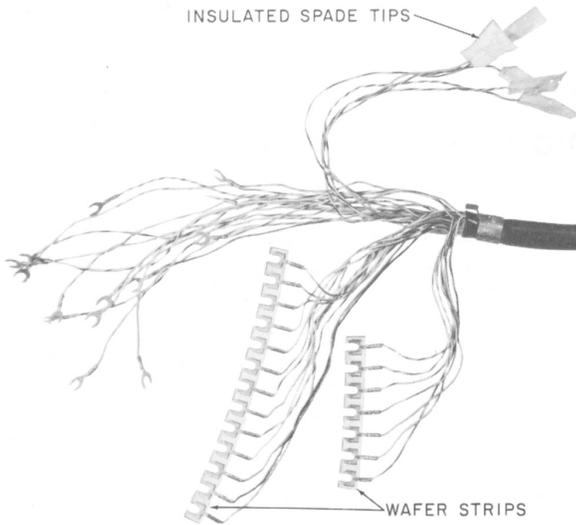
Slotted Wafer Strip End of Mounting Cord
